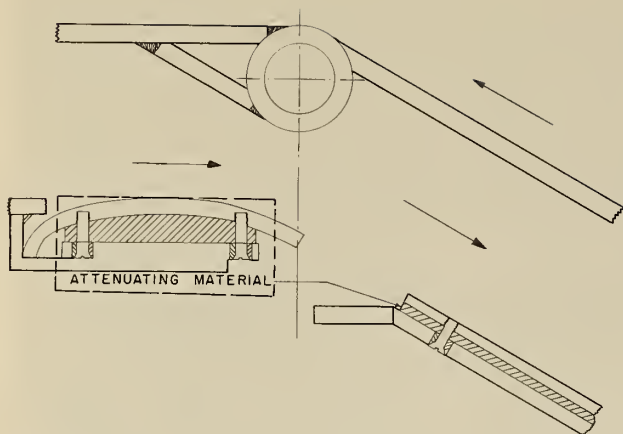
Side view of upper and lower decks showing an attenuated wear shoe at the hinge point on the lower deck.
